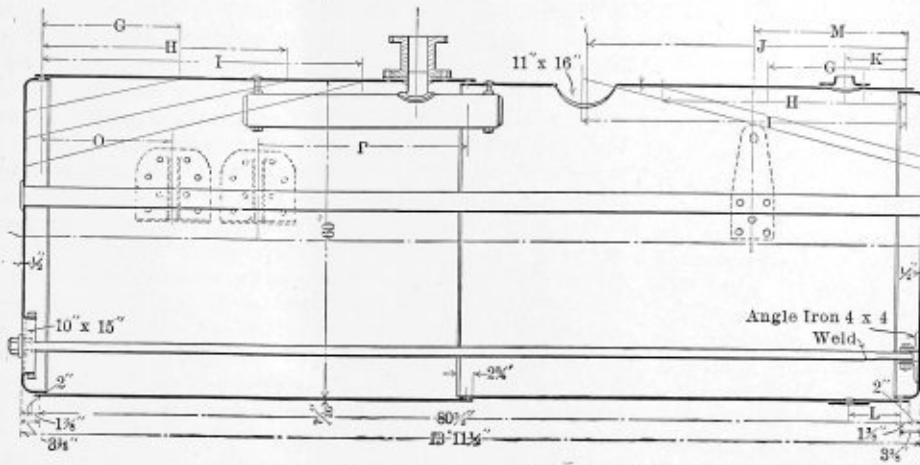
SECTIONAL VIEW OF COMPLETED BOILER.
